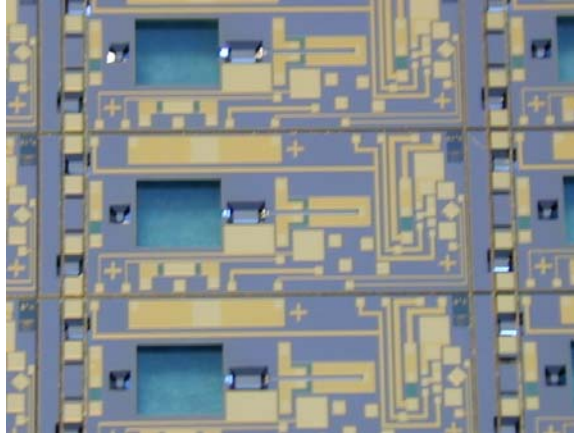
A silicon board for assembly of optical components, manufactured by C2V.
